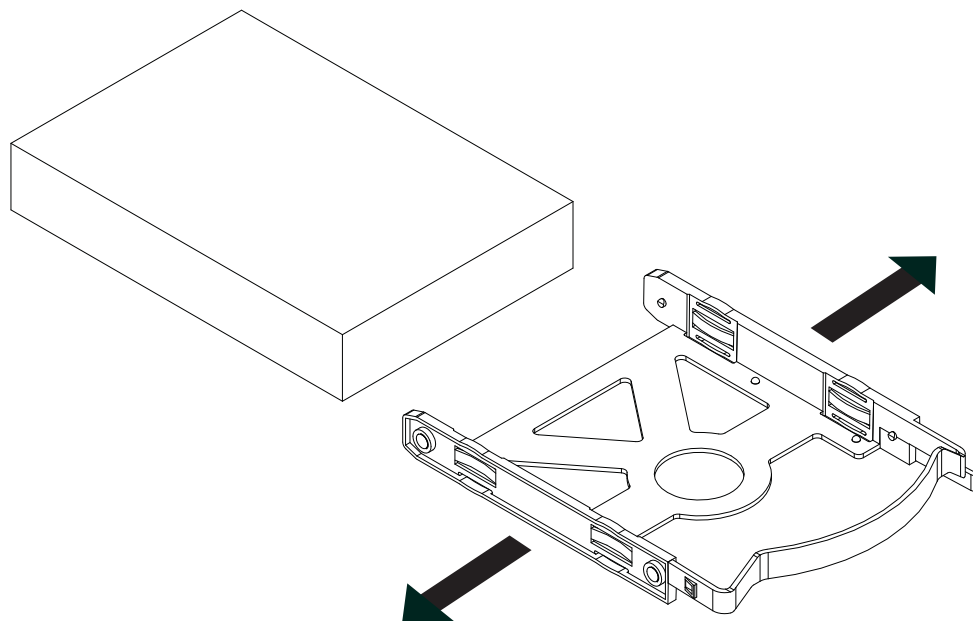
Removing a 3.5" Hard Drive from a Drive Carrier
